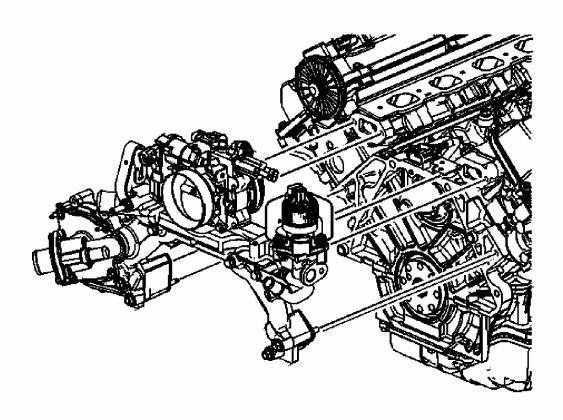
View Of Water Pump Housing Courtesy of GENERAL MOTORS CORP.
